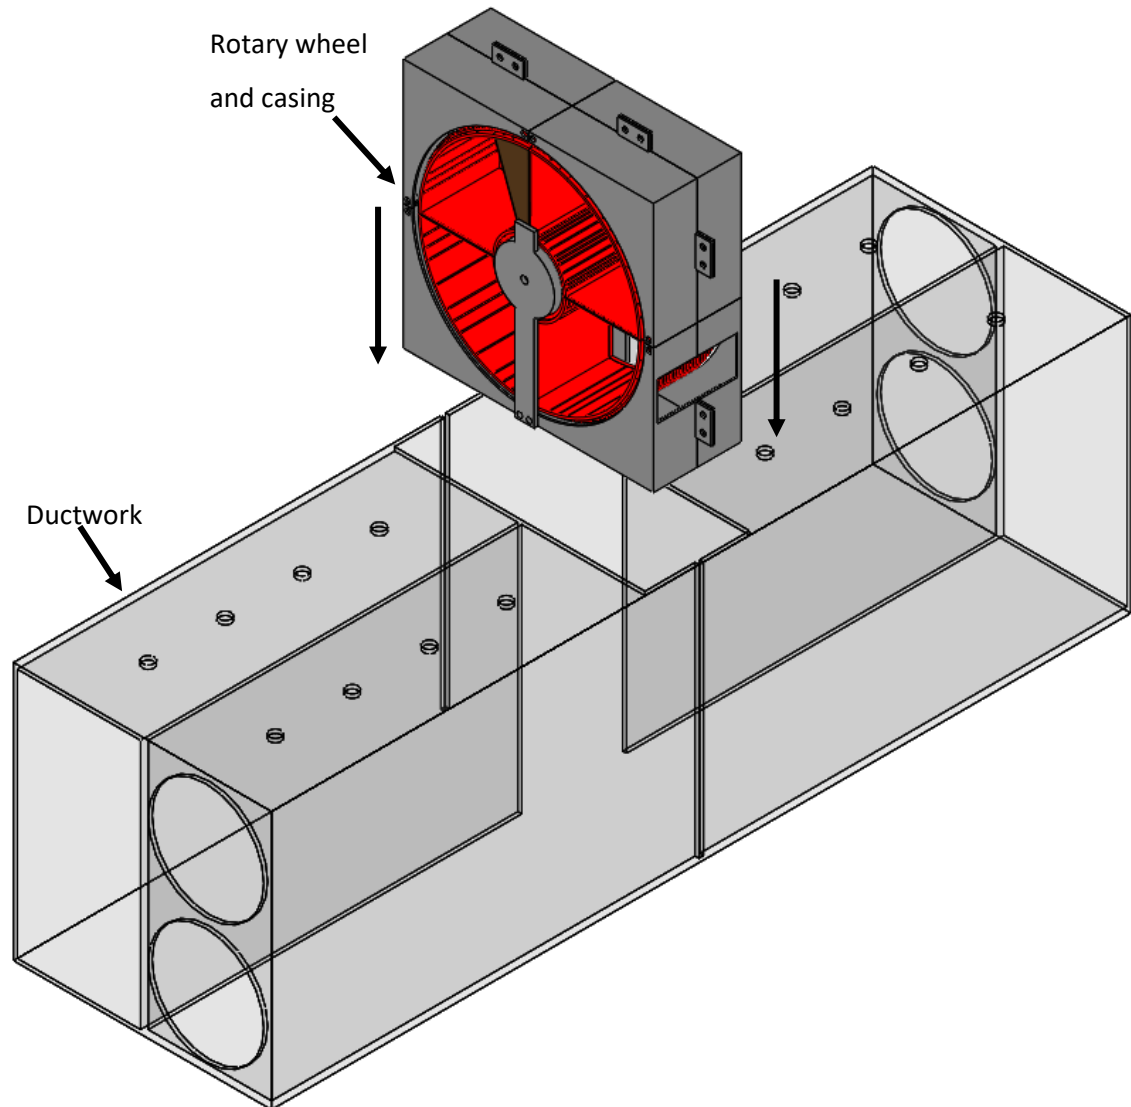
Assembly of rotary wheel and casing into experimental ductwork
